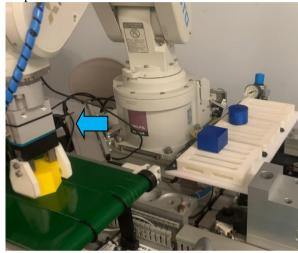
Robot arm pick workpiece palletizer system based on shape
